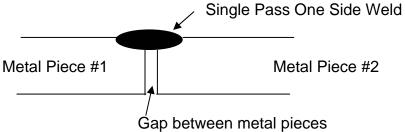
PARTIAL PENETRATION WELDS
